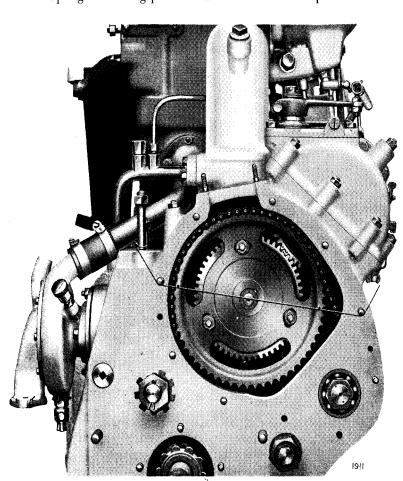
VALVE CAMSHAFT CHAIN WHEEL AND FUEL INJECTION PUMP GEARS
